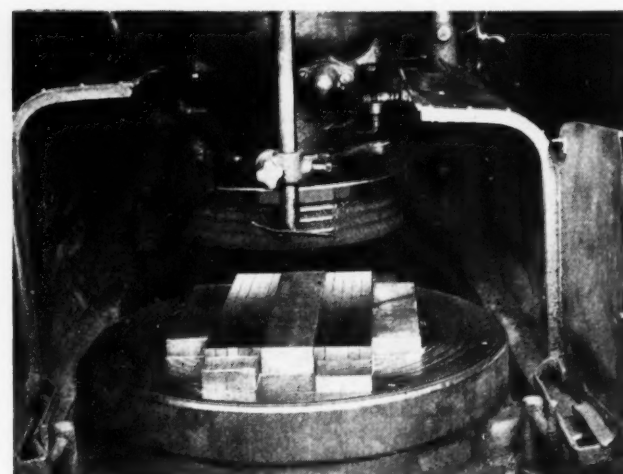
An Arrangement of Parallel Blocks that Provides Wheel Clearance in Grinding Steel Gibs
